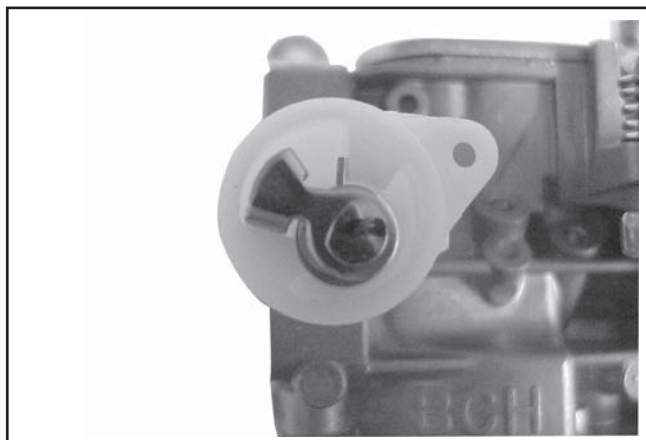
Installing Idle Speed Adjusting Screw and Spring.
